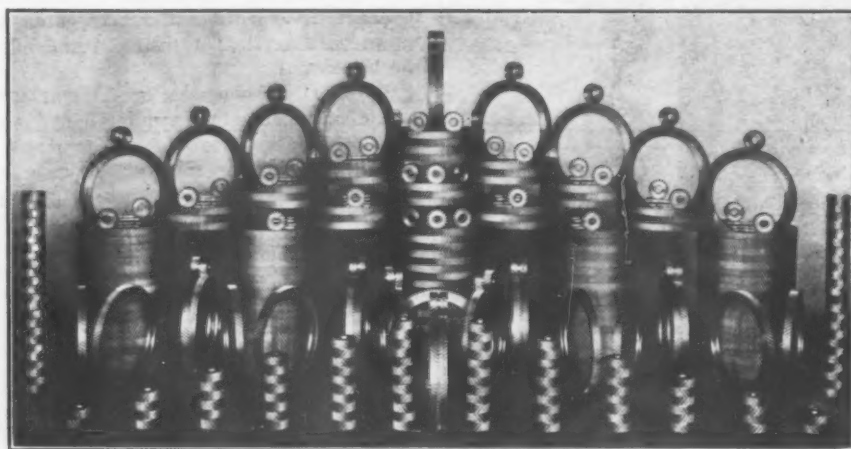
A Large Order of Spiral Gears Executed on the Gould & Eberhardt Gear Generator.
